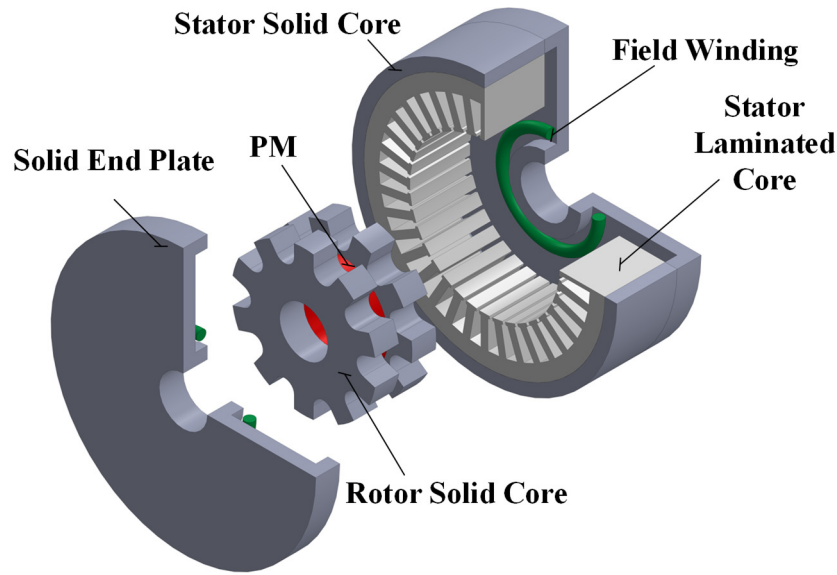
HE stepper machine [KOS05] [KOS10].
